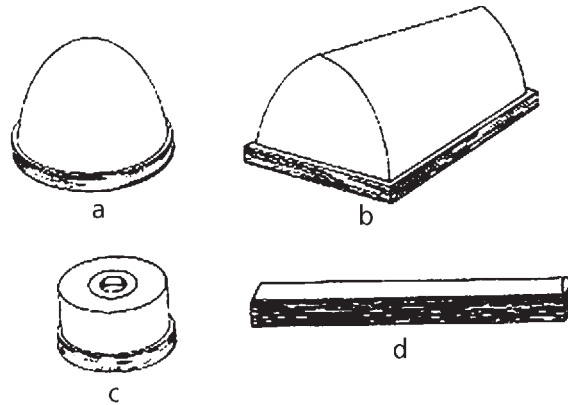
Examples of different printing pad designs – a) standard; b) wedge; c) doughnut; d) ribbon
